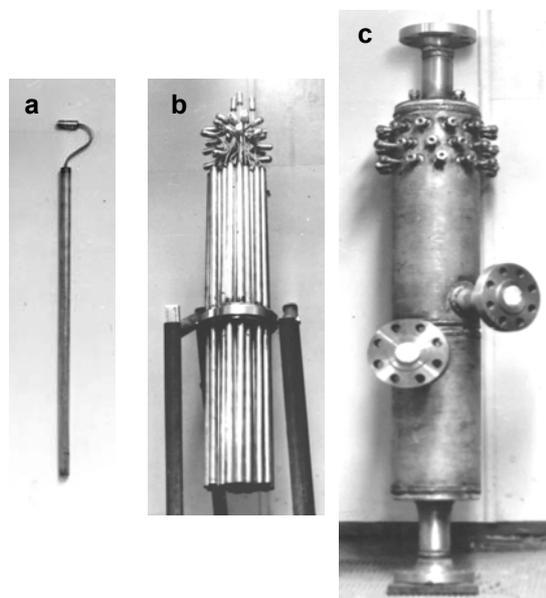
Experimental heat exchanger of emergency cooling on basis of TPTS: a) ordinary thermosyphon with filling stem, b) assemblage of TPTS with central tube desk, c) thermosyphon heat exchanger as an assembly
